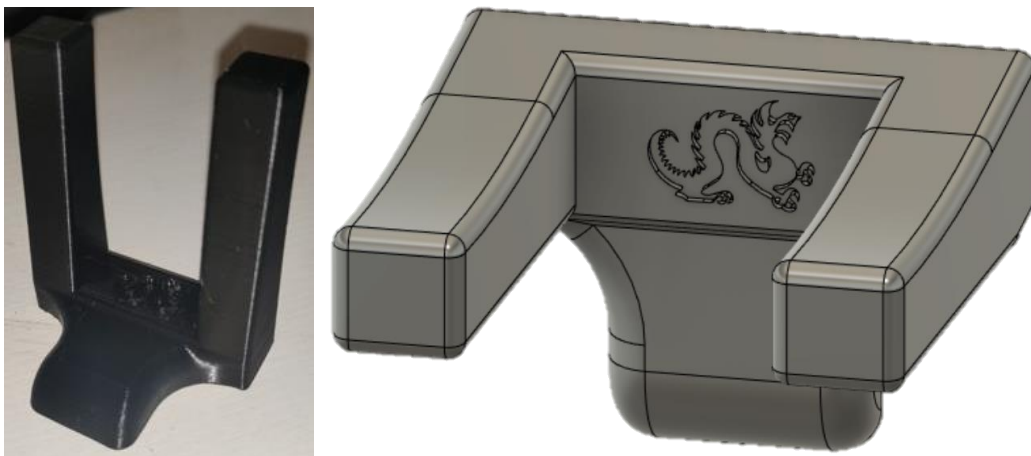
3D-Printed Barcode Scanner Holder (left) and Fusion360 barcode scanner holder design (right)
